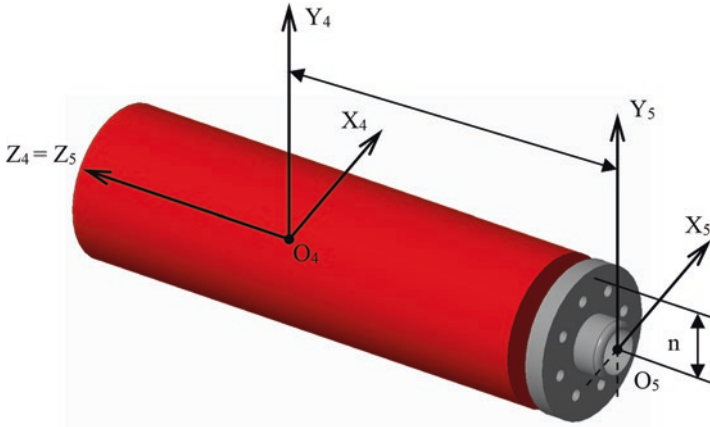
Detailed spindle calculation model of the milling machine [3]
